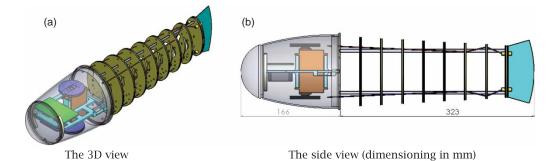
The CAD model of the wire-driven swaying robot fish.
